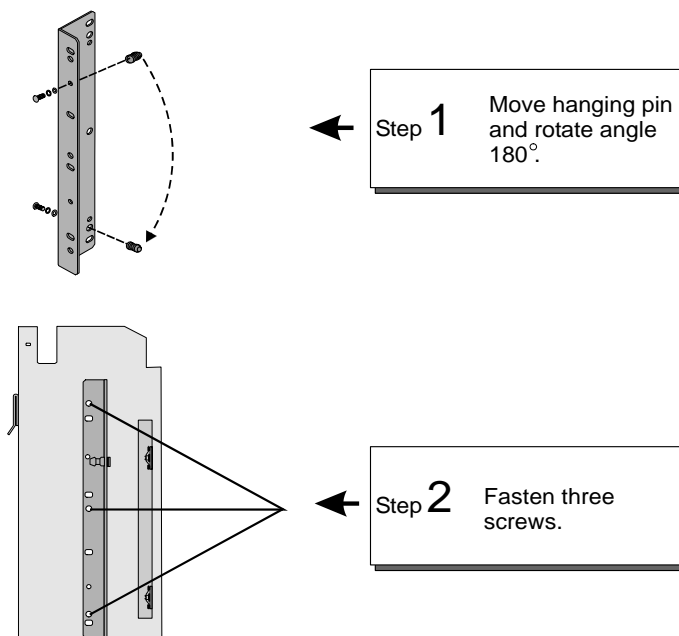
Preparing the Mounting Bracket of the Cage for 19" Rack Assembly
